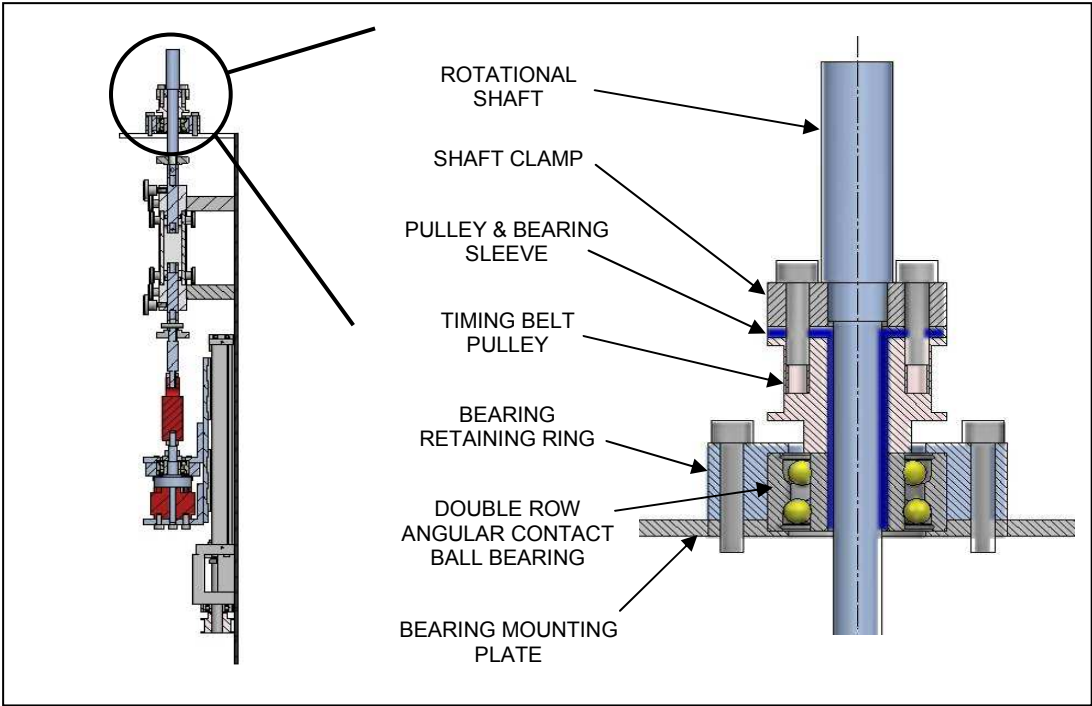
Rotational actuation assembly with pulley and bearing sleeve
